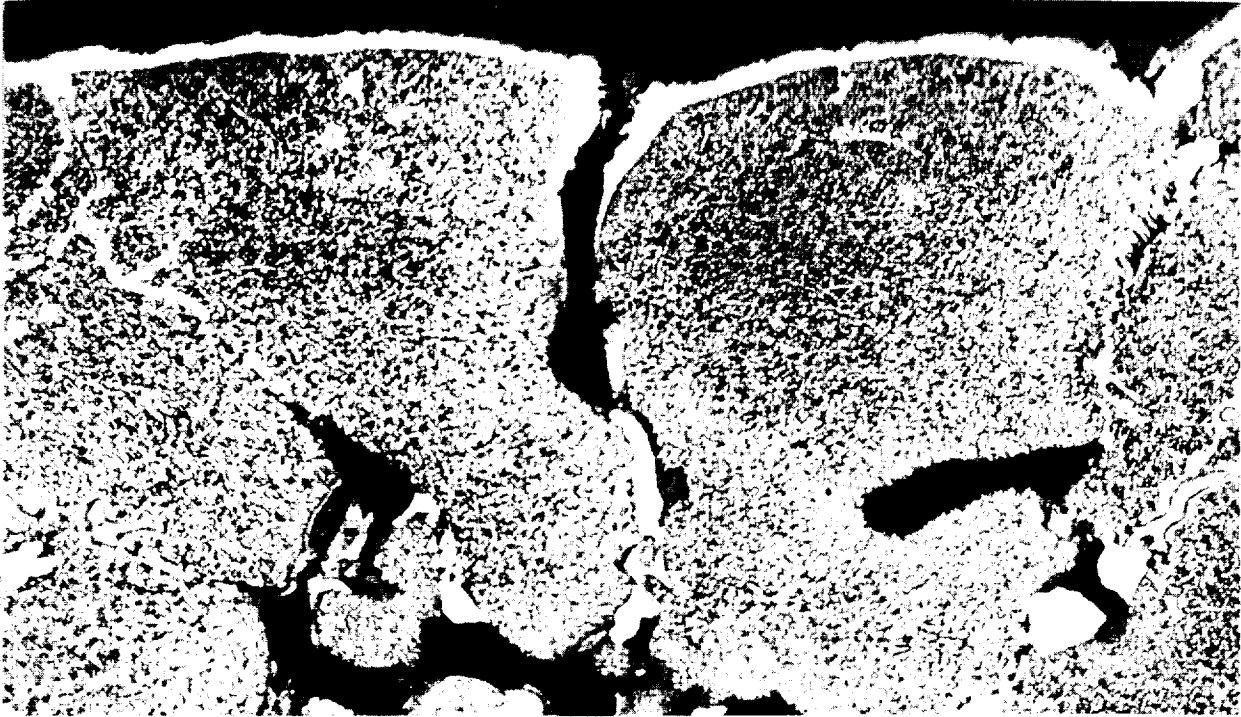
Cast Udimet 700 Longitudinal Section Showing Possible Crack Nucleation Sites.
